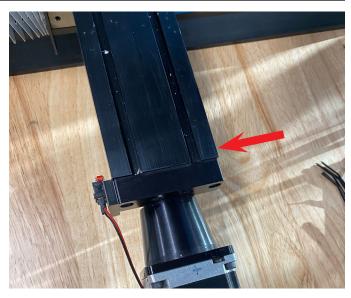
Mill table top view. The hard stop screw is located under the mill table near the location of the red arrow.
